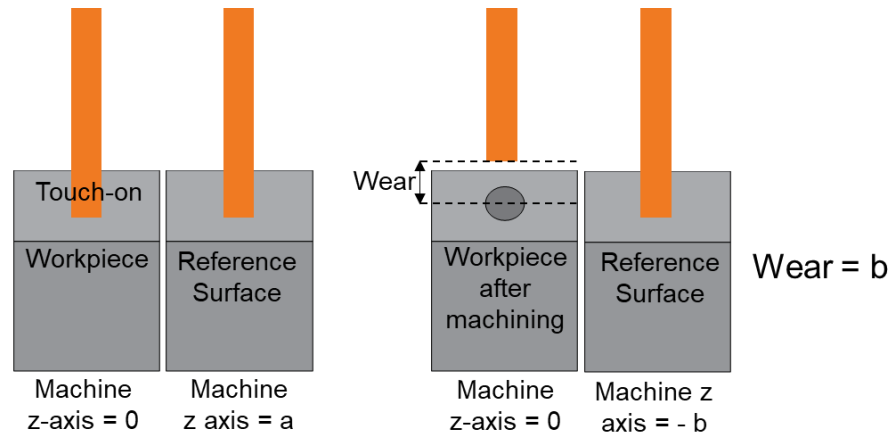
Method for calculating electrode end wear using a reference surface, done before and after machining.
